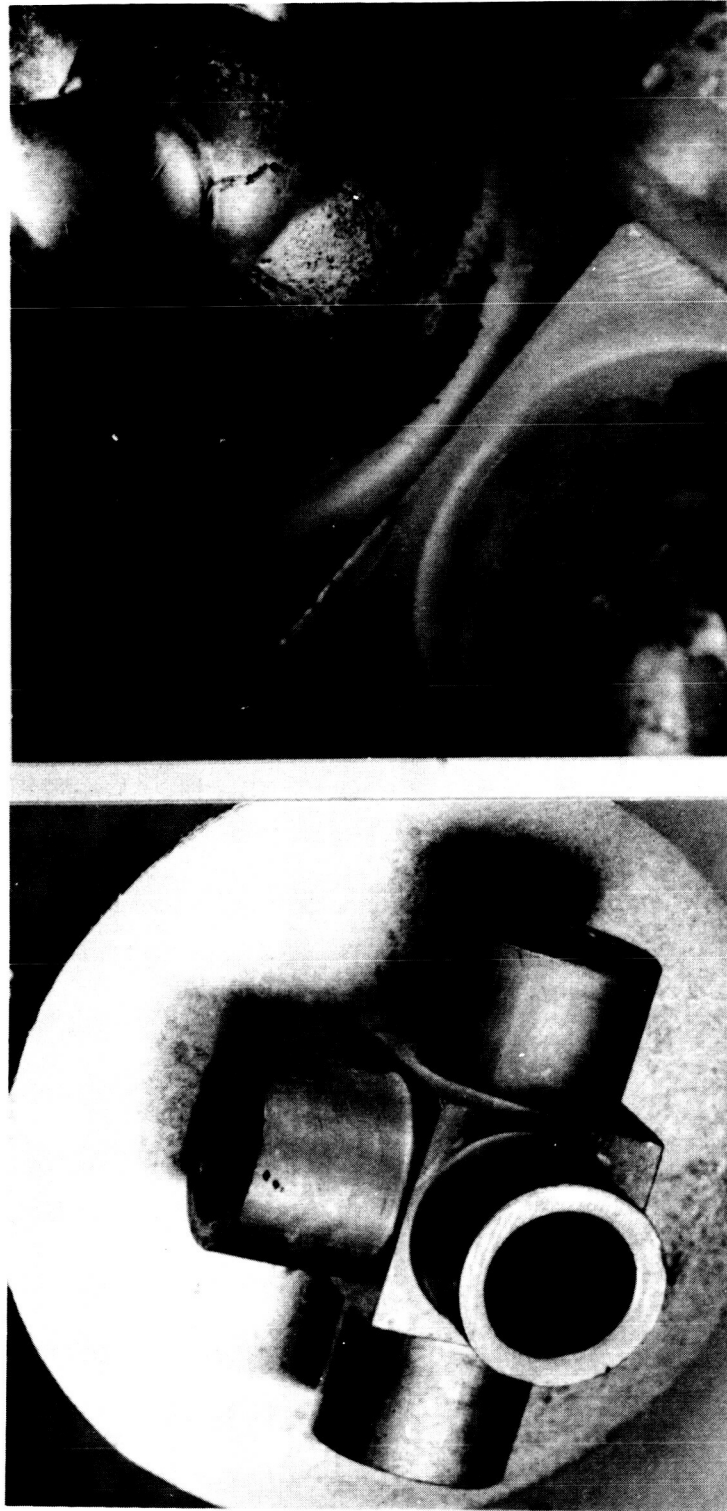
Fitting for concentrated  $H_2O_2$  service machined from 1060 aluminum extruded bar stock. Orientation of fitting in bar cross section is shown at left; close-up view of leaking corrosion hole (encircled) is pictured at right.
